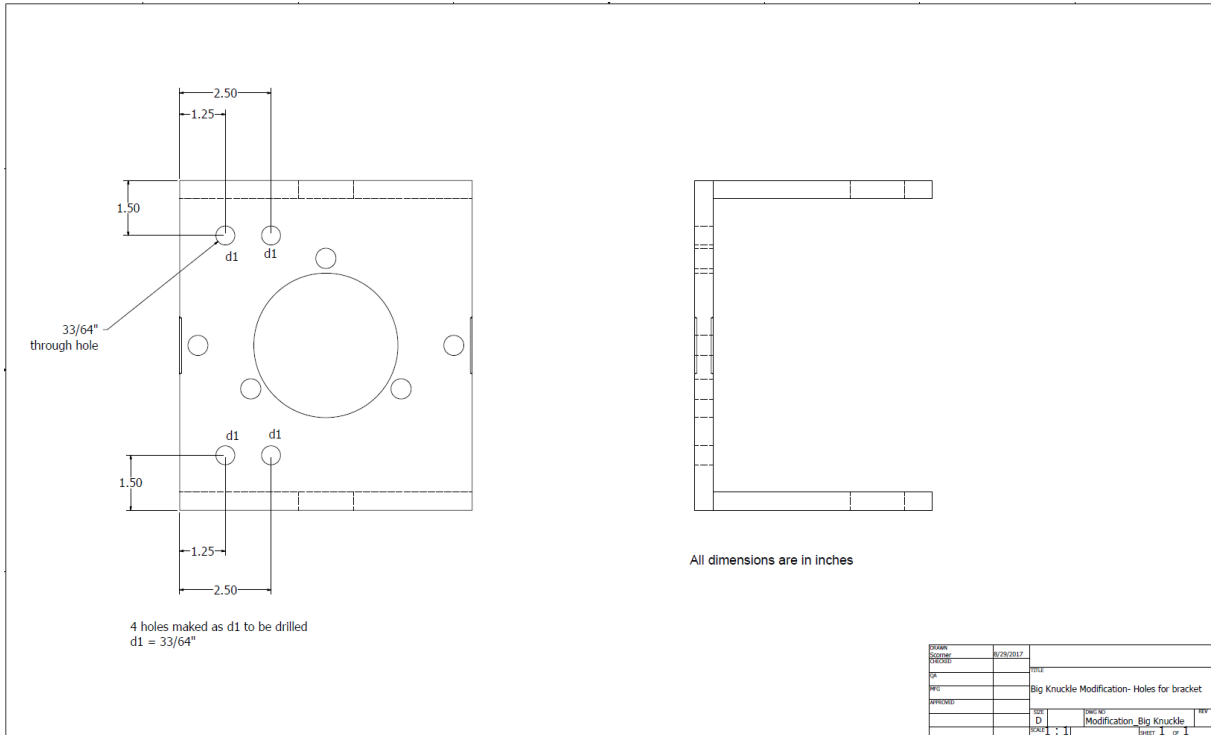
Drilling of holes on big knuckle for mounting the brake caliper brackets.
